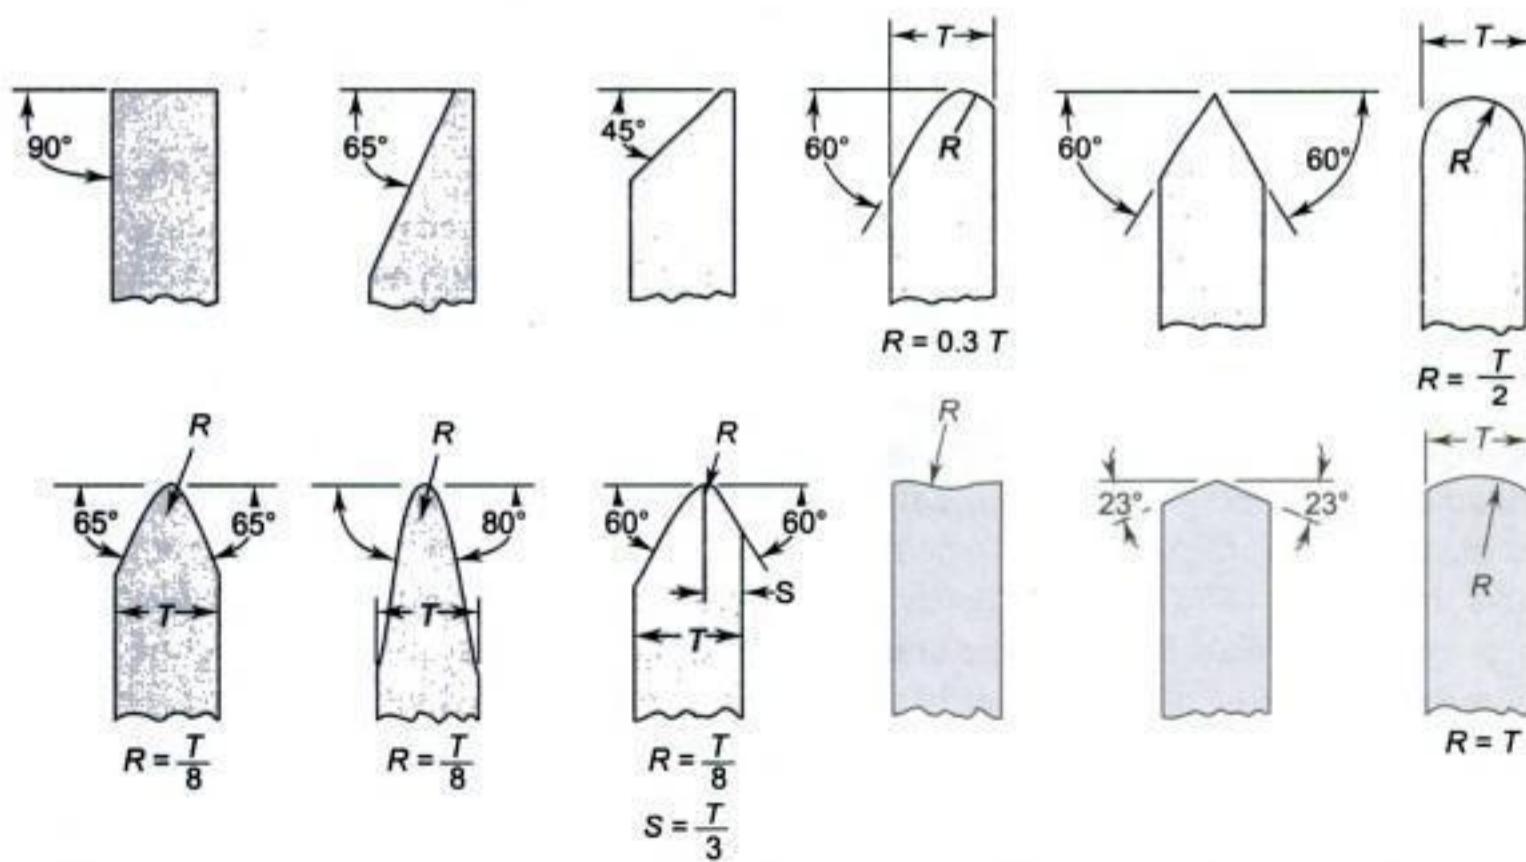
Various faces of grinding wheel form for the straight (Type 1) wheel shown in Fig. 9.4.
